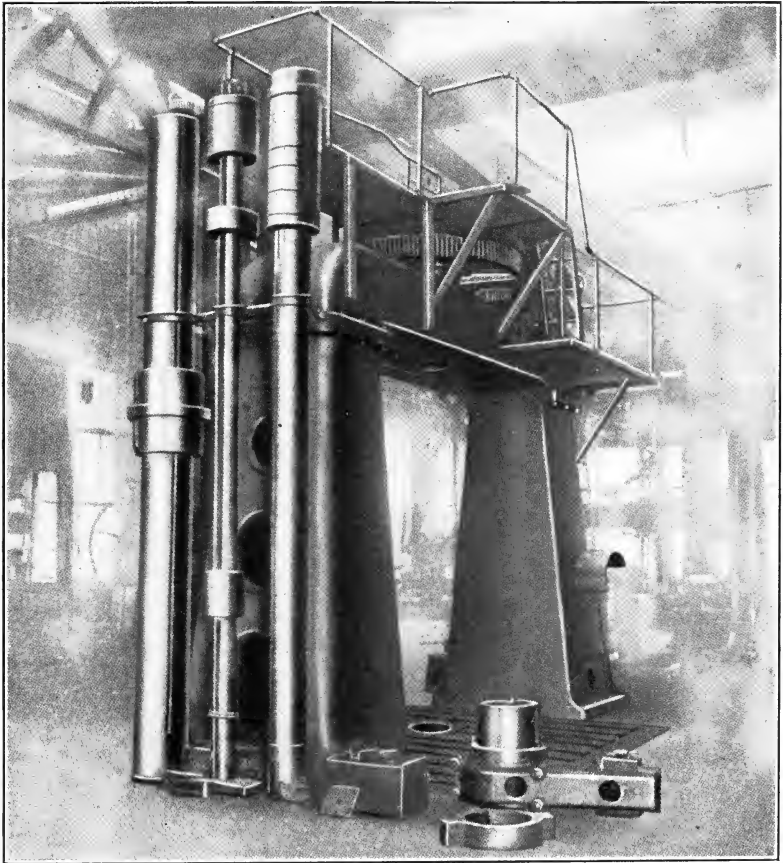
Large vertical cylinder boring machine and boring bars.
